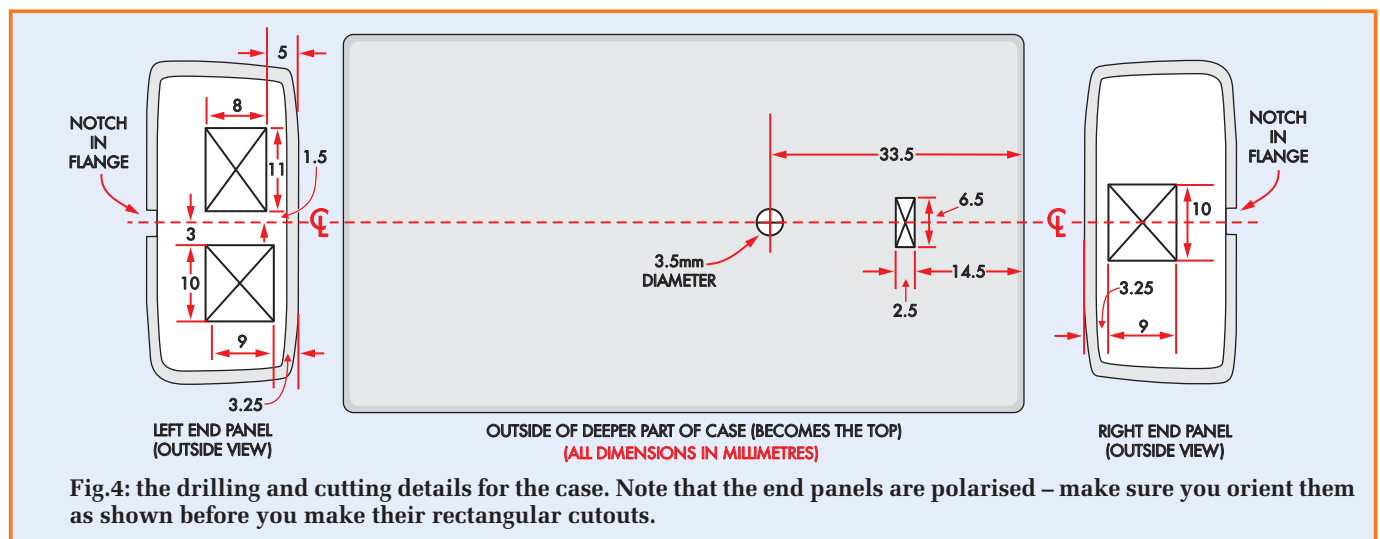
the drilling and cutting details for the case. Note that the end panels are polarised – make sure you orient them as shown before you make their rectangular cutouts.
